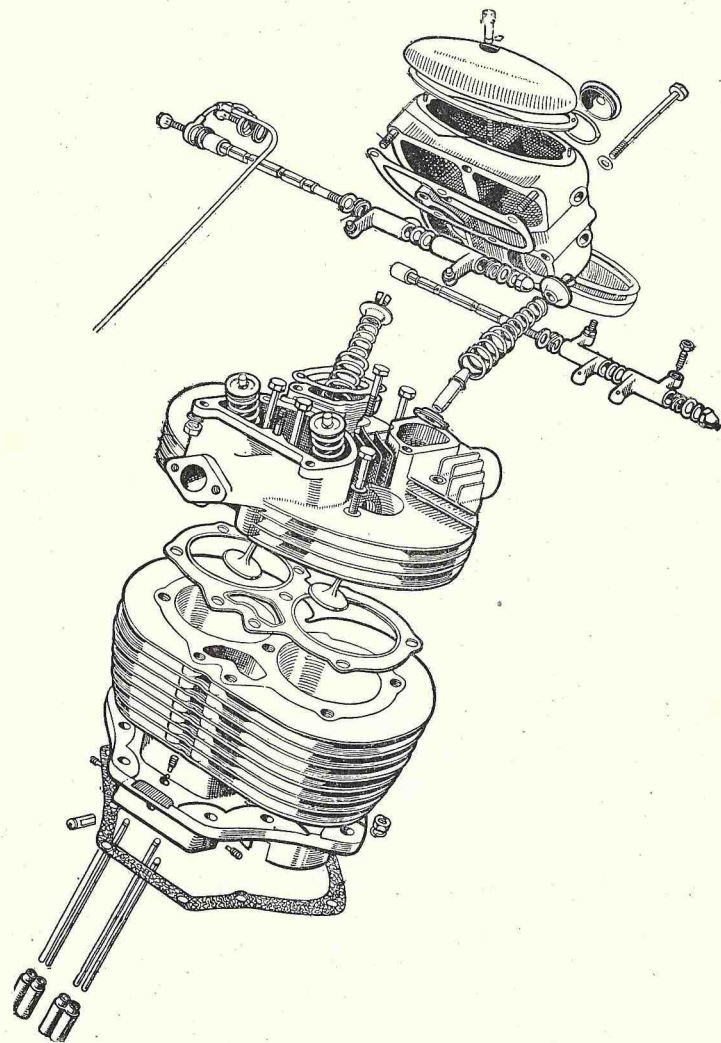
EXPLODED VIEW OF 650-C.C. TWIN-CYLINDER MODEL FH CYLINDER-HEAD AND BLOCK ASSEMBLY.
